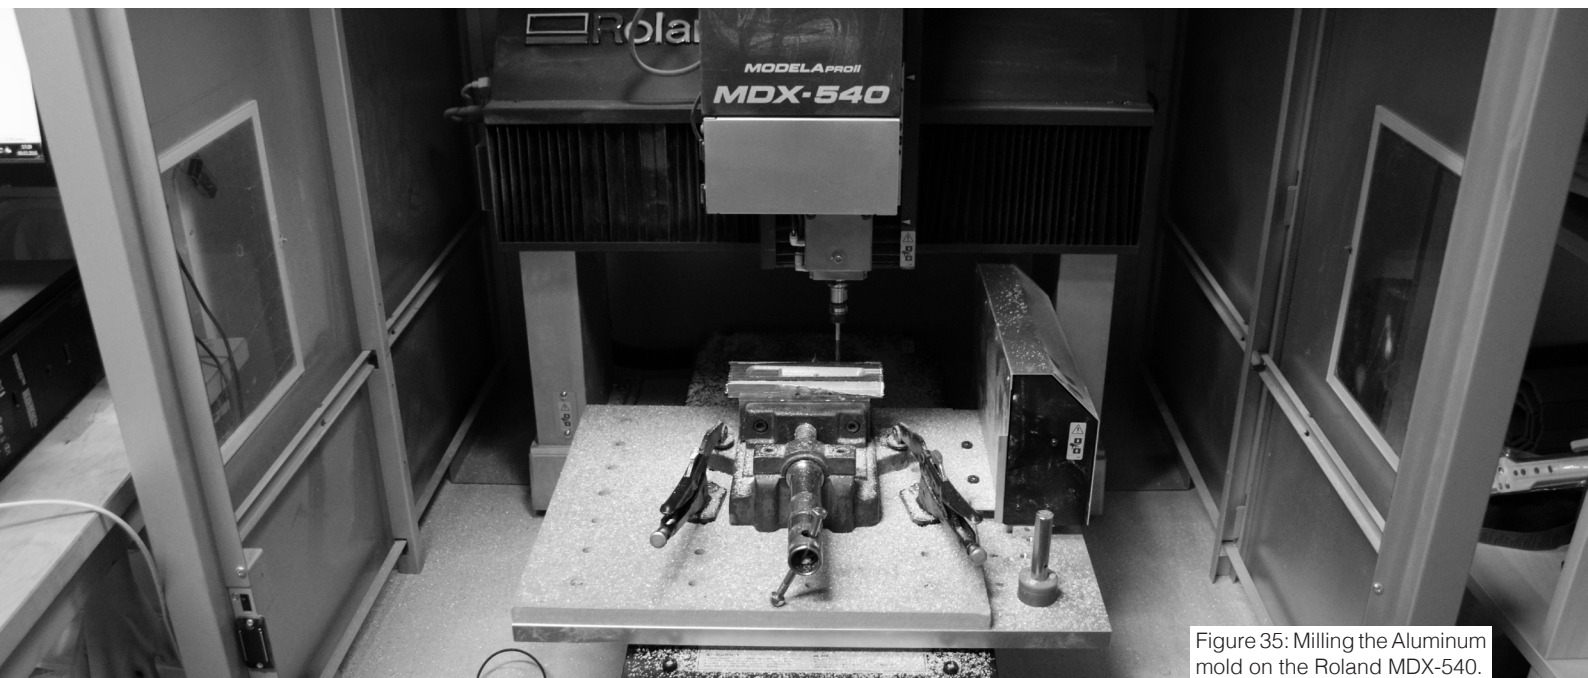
Milling the Aluminum mold on the Roland MDX-540.
